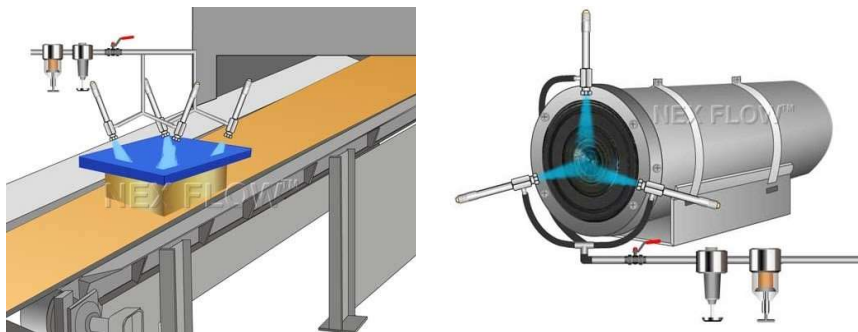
Applications of Vortex Tube: Vacuum forming process (a) Camera Lens cooling (b) Machine cooling
